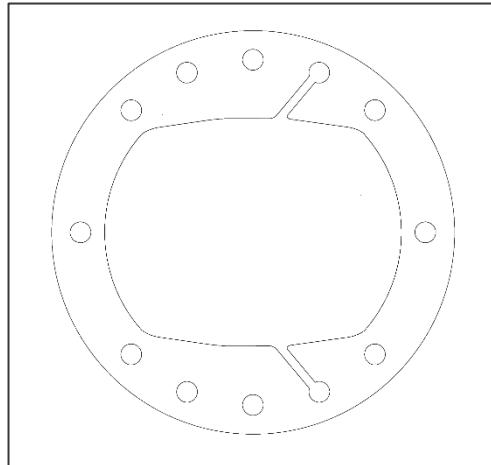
Gasket drawing for laser cutter, Nick Laessing
